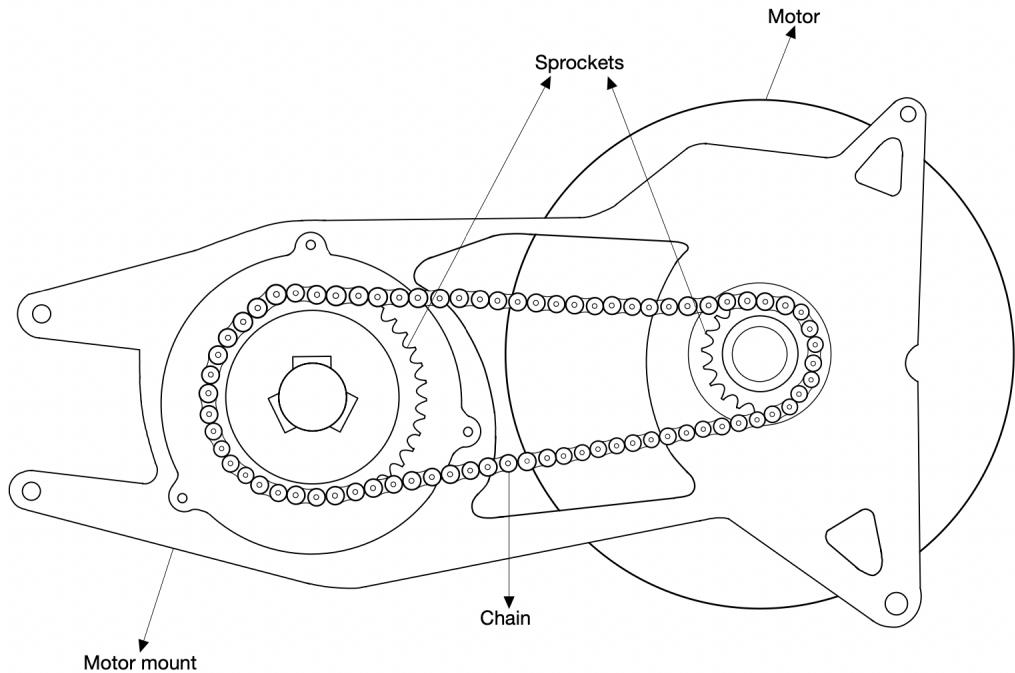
Front View of the Out-Wheel Motor with Chain and Sprocket Configuration [4]
